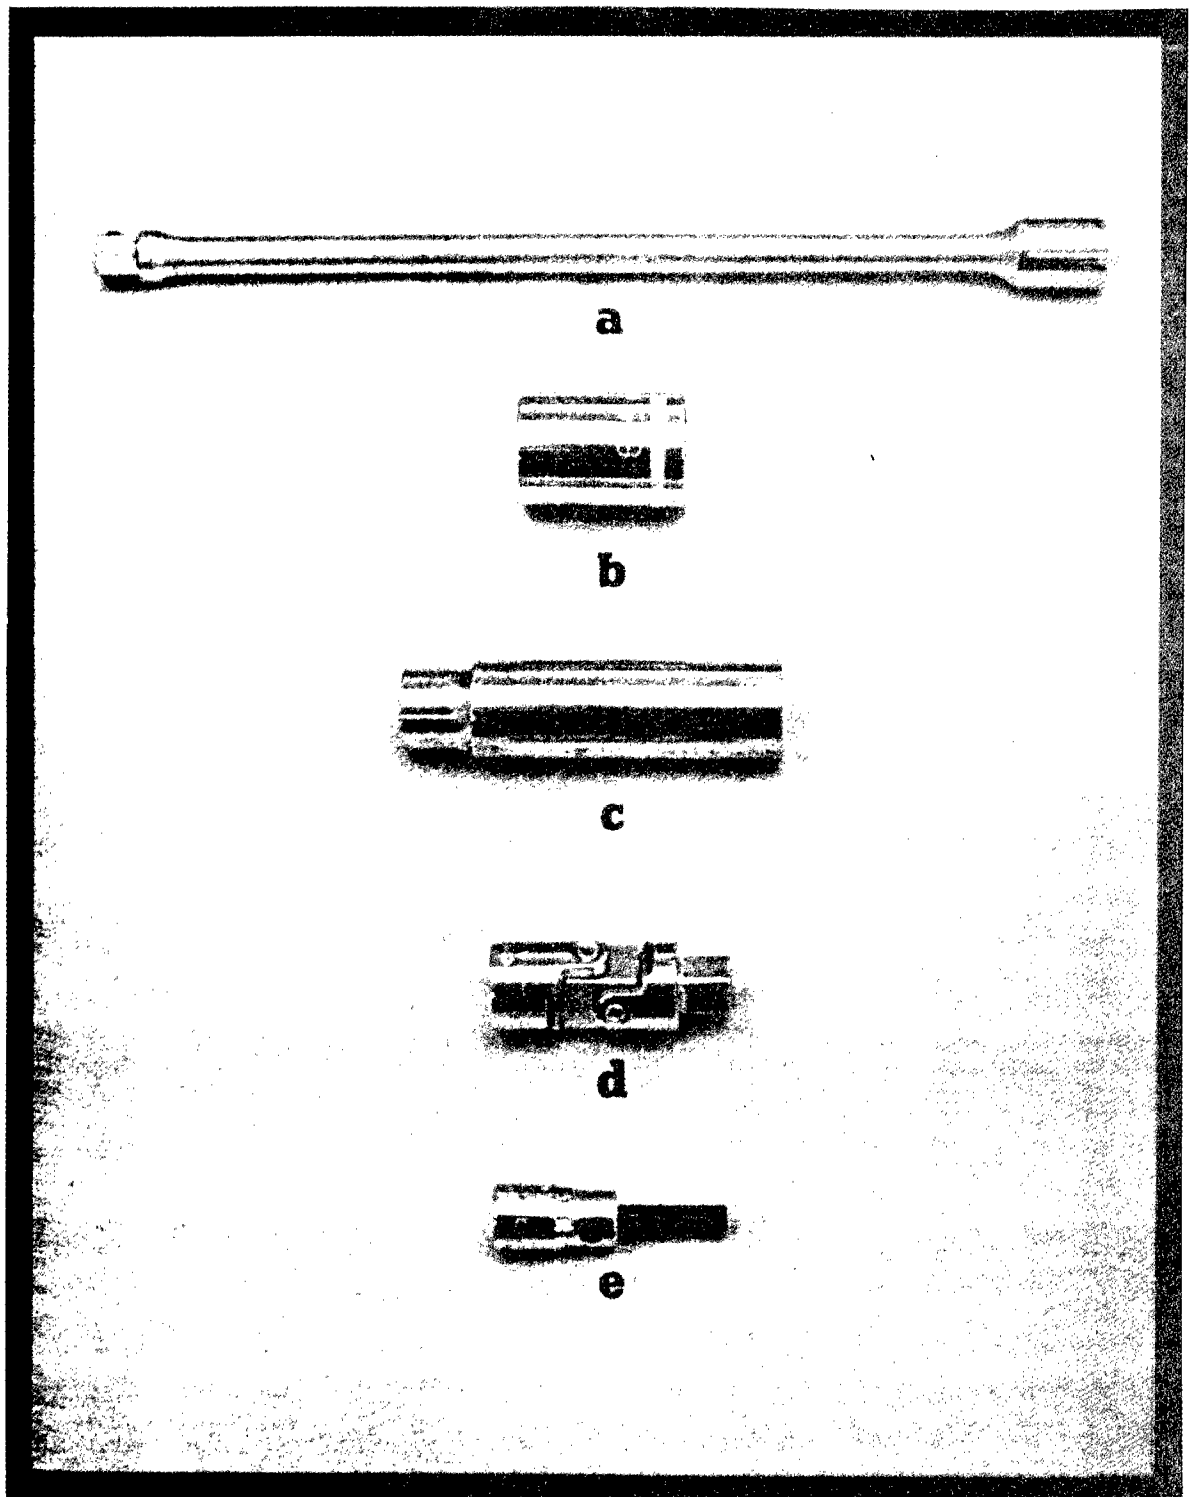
Extensions and Sockets Include (a) Extension, (b) Regular Socket, (c) Deep Socket, (d) Universal Joint, and (e) Hex Drive.
